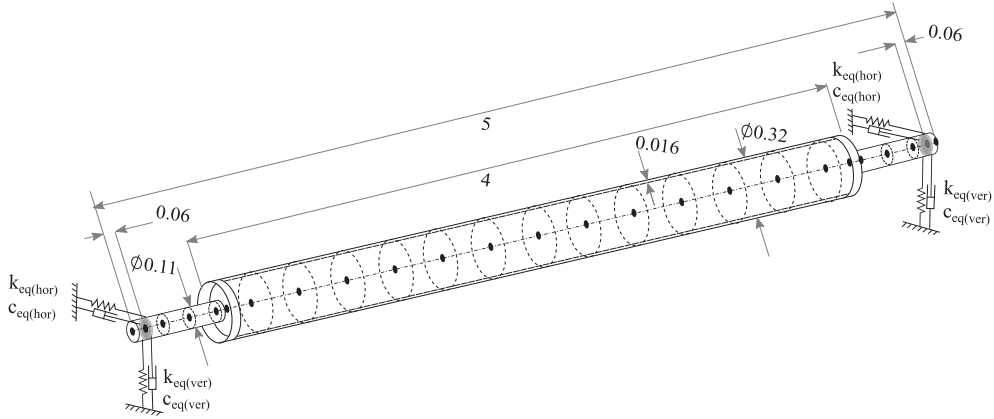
Wireframe sketch of the guide roll of a paper machine (test rotor) with FE discretization. All dimensions are in meters.
